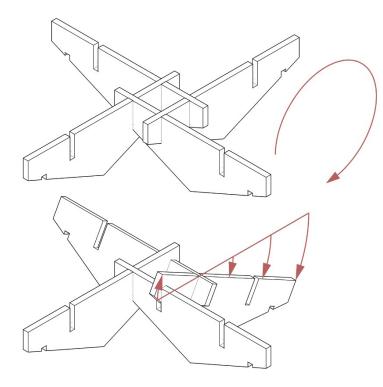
Original Notched Connection Created by Structural Design Student Group
